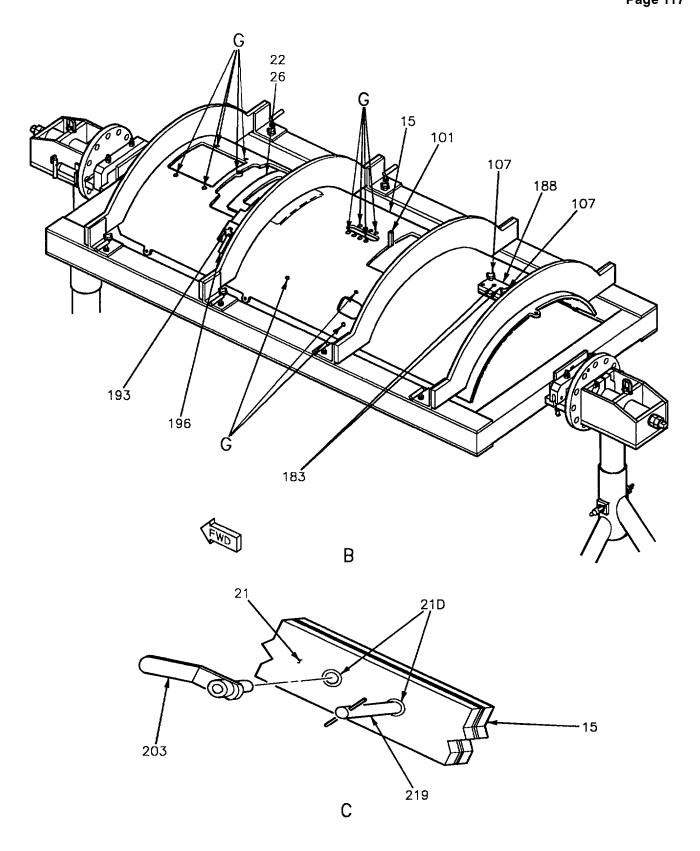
Replacement - 74A313055 Skins (Sheet 2)
